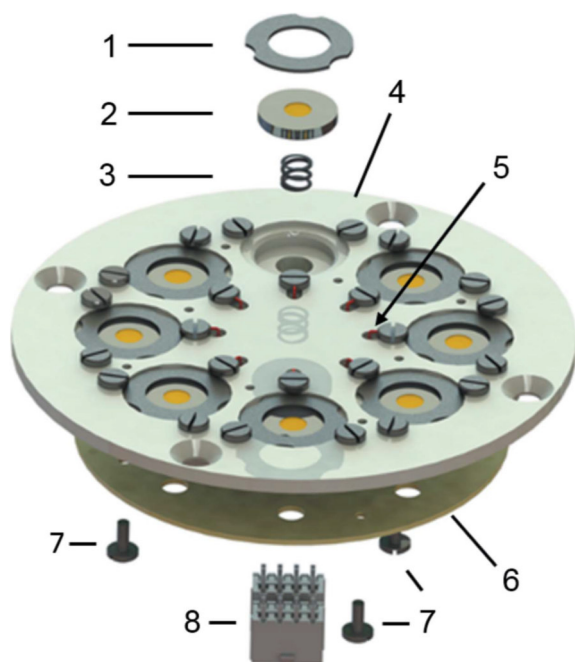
In operando* coin cells holder: (1) metallic cap; (2) *in operando* coin cell with Kapton windows; (3) metallic helical spring; (4) nonconductive sample holder, e.g. made of POM; (5) wire to connect metallic cap with PCB; (6) PCB; (7) screws to fix PCB to sample holder; (8) 2 x MOLEX eight-pole connector.^[52]
